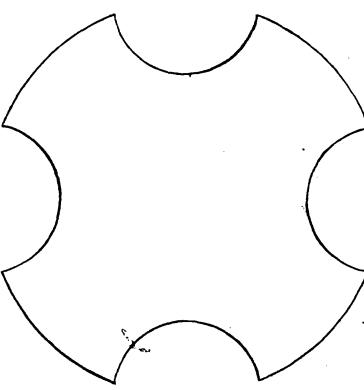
Wabbler, American Standard 24-Inch Sheet Mill.
